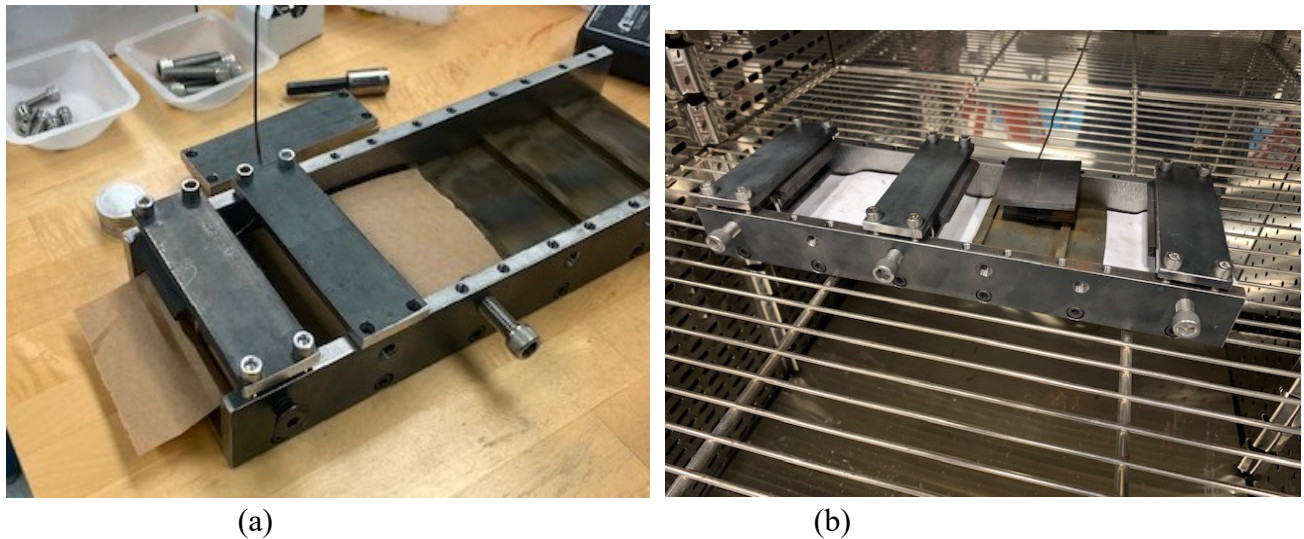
(a) SMC tooth parts in assembly with screw (b) SMC tooth assembly in the oven.
